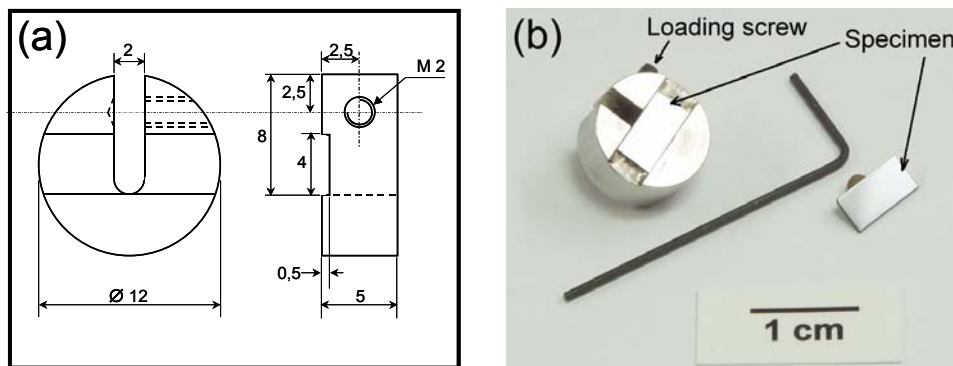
Line diagram (a) and photograph (b) of the loading fixture used to apply displacement controlled loading to the specimen. The photograph also depicts the specimen slide-fitted and glued in the slot provided.
